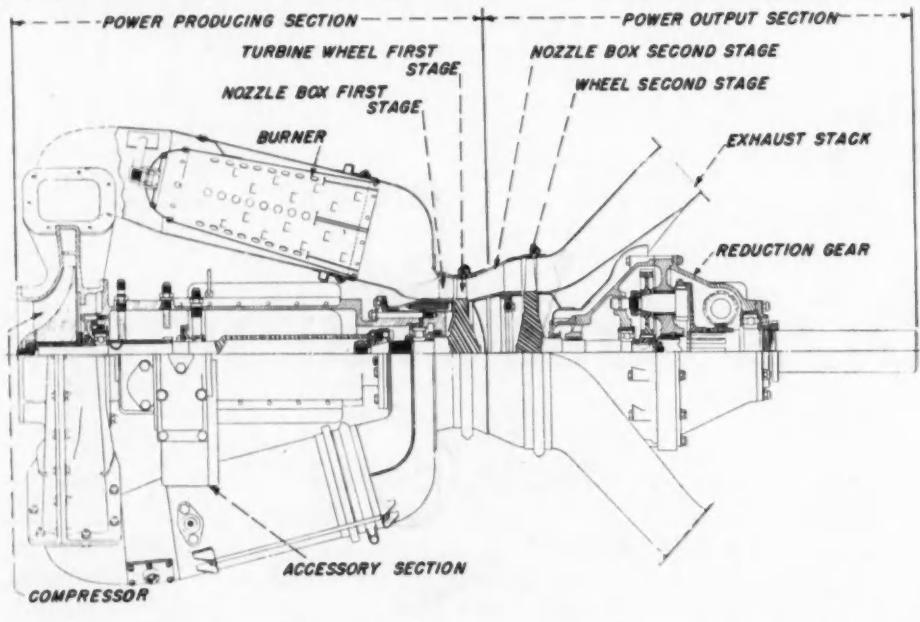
Section drawing of Boeing Model 502 gas turbine engine
